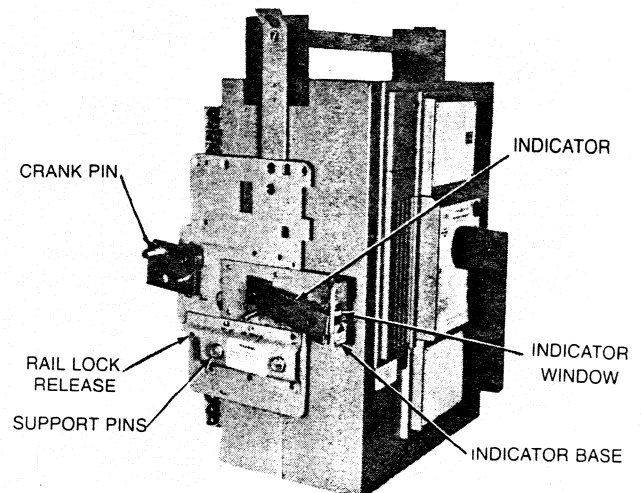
CARRIAGE ASSEMBLY—LEFT SIDE
